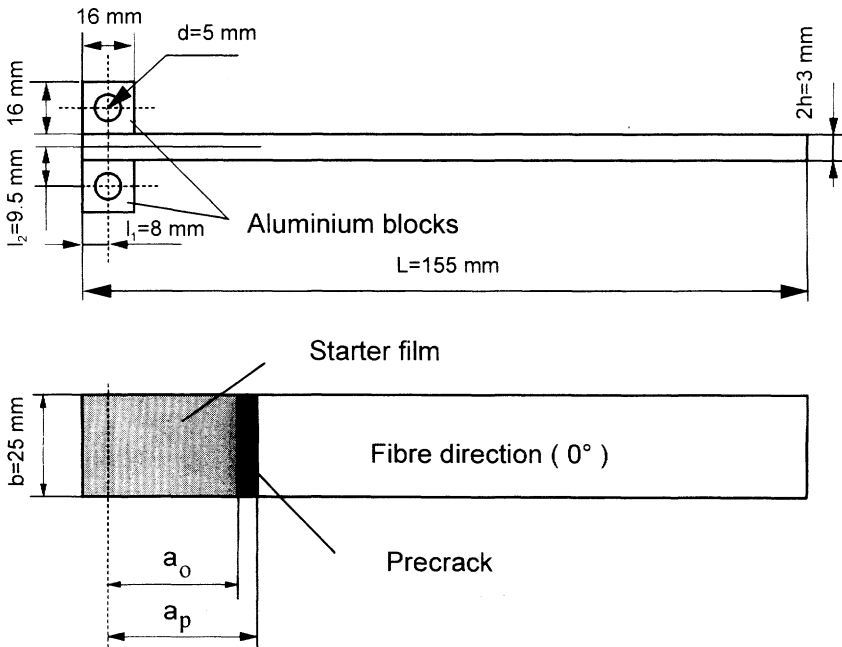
Double cantilever beam specimen (DCB) for the Mode I tests and dimensions of the specimen and the aluminium blocks (in mm).
